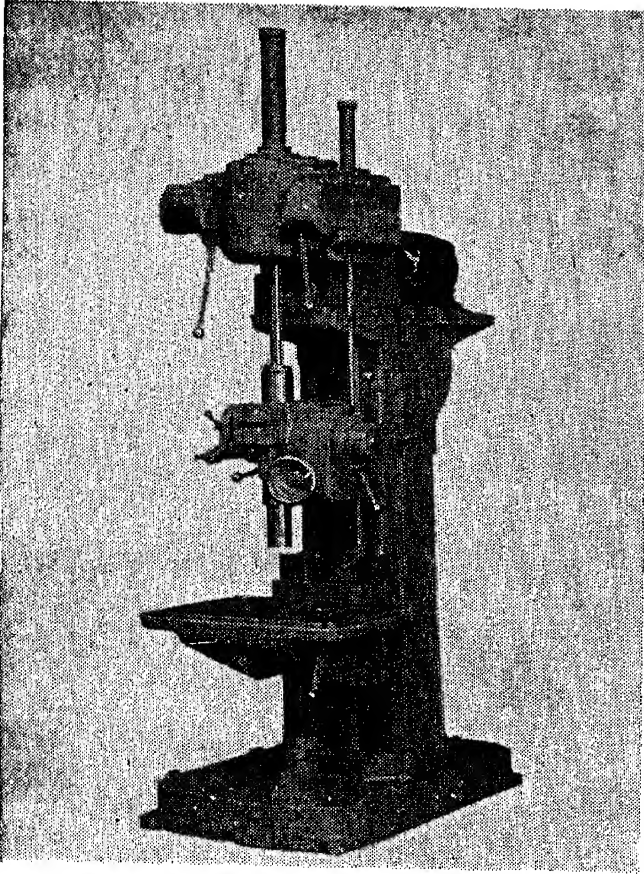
A 25 in. single spindle upright drill press. (Courtesy The Fosdick Machine Tool Co.)
